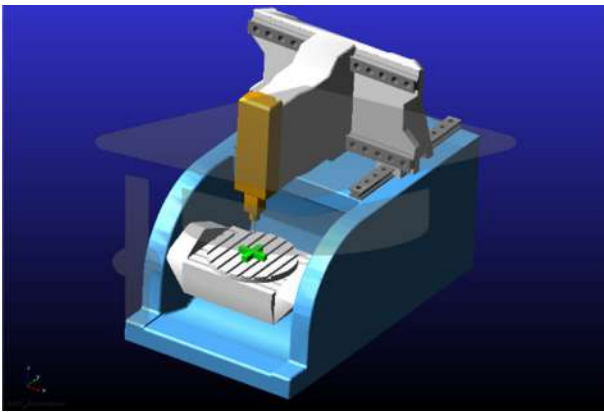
Five-axis machine tool (TRT-CA type) and the proposed cross-shaped calibration artifact
